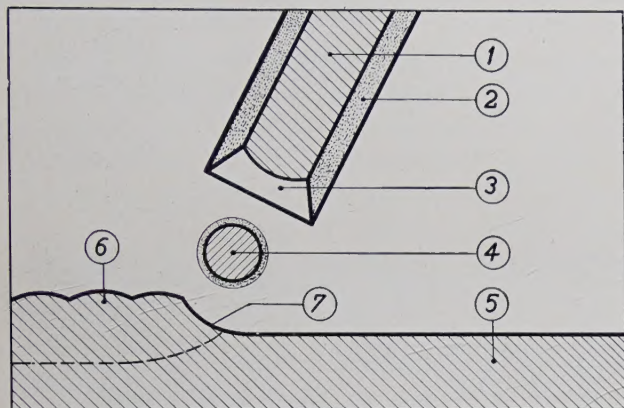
Diagrammatic sketch of drop transfer from the welding electrode to the workpiece (cross-sectional view): 1 core, 2 coating of the welding electrode, 3 sleeve, 4 drop enclosed by coating material, 5 piece of work, 6 bead, 7 pool.
